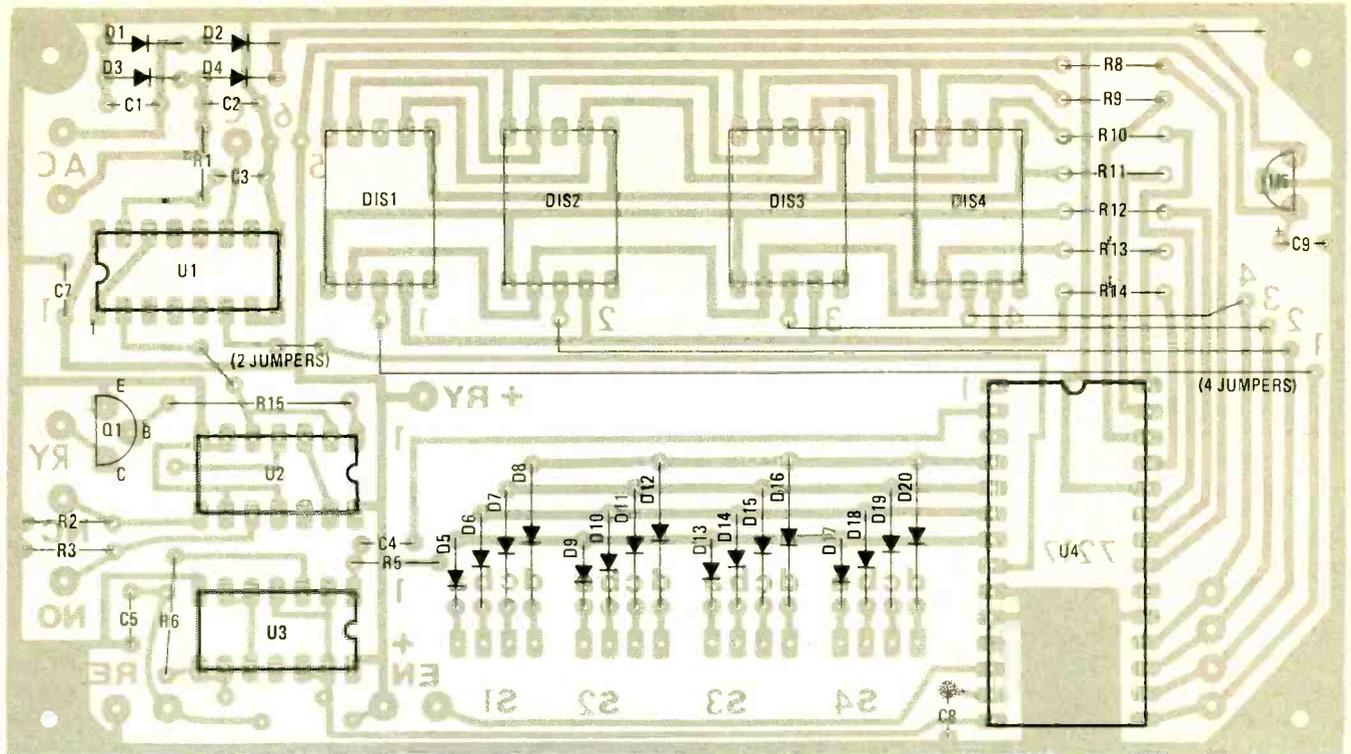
PARTS LOCATION DIAGRAM with printed-circuit board shown foil-side down in this x-ray view.
